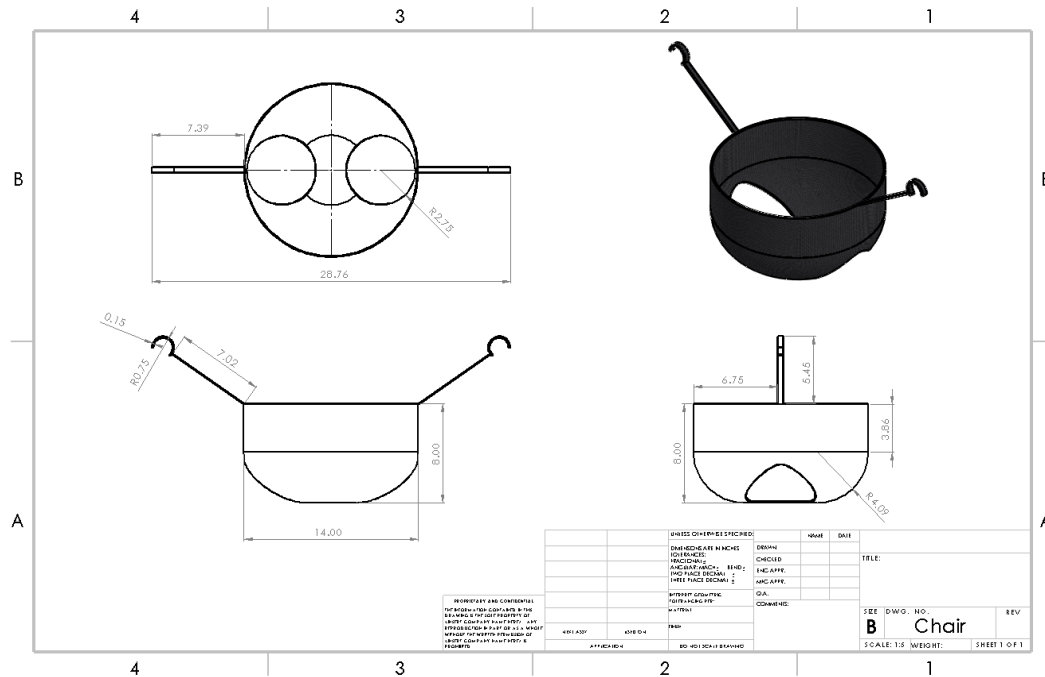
The sketch and dimensions of the chair/harness.
